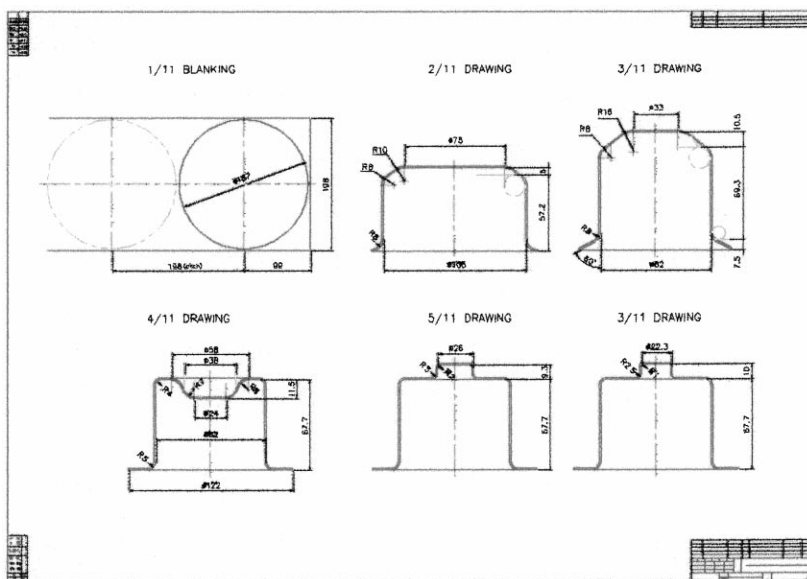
Sequence drawing for the deep drawing part of the 'motor housing': industrial practice.
